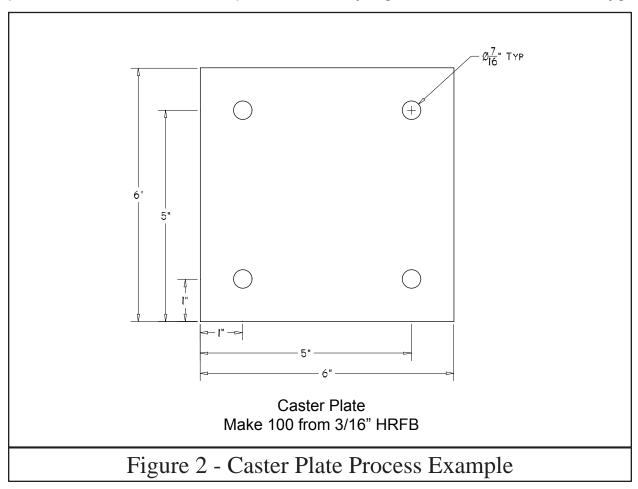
shows a detail drawing for a caster plate. 100 plates need to be fabricated for a new stock turntable assembly. They are to be made from 3/16" thick by 6" wide hot rolled flat bar. The holes need to match the bolt pattern of the casters.
